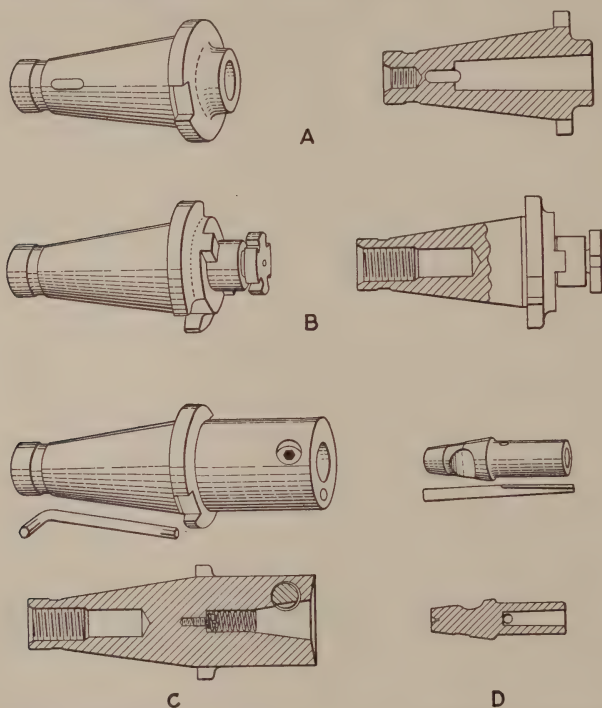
Examples of adapters to fit the standard milling-machine spindle. *A*, for regular taper-shank end mills. *B*, for shell end mills. *C*, for the smaller Brown & Sharpe cam-lock collets as in *D* or for end mills, etc., having cam-lock taper shanks.
